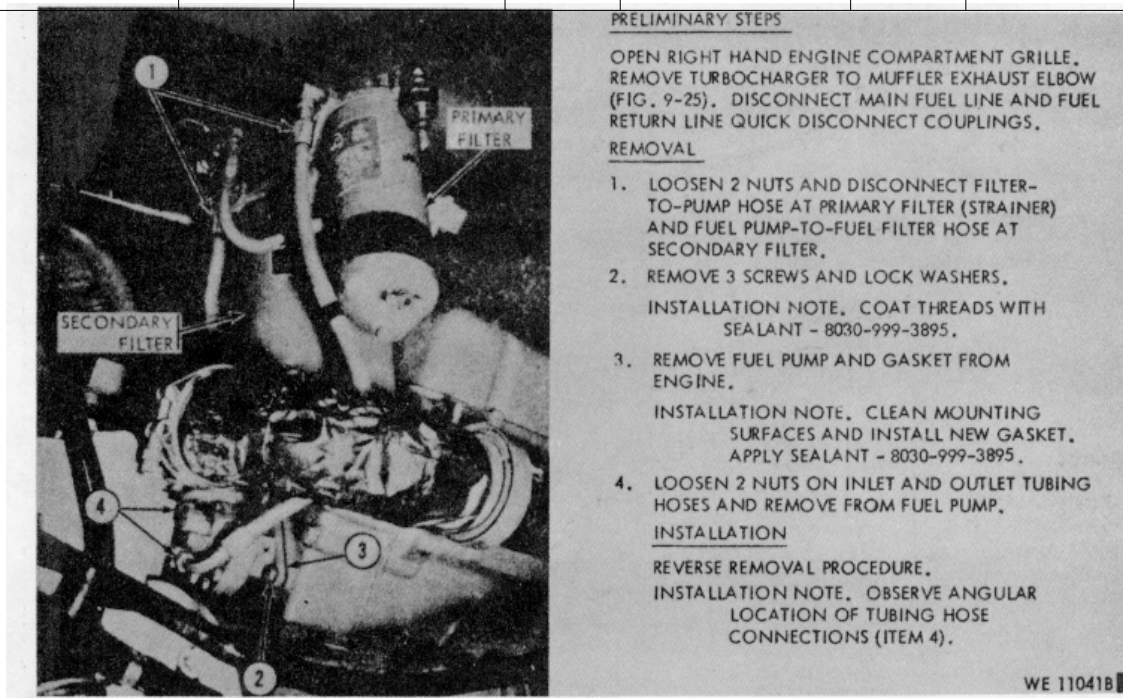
(Superseded) Removal/installation - engine fuel pump
